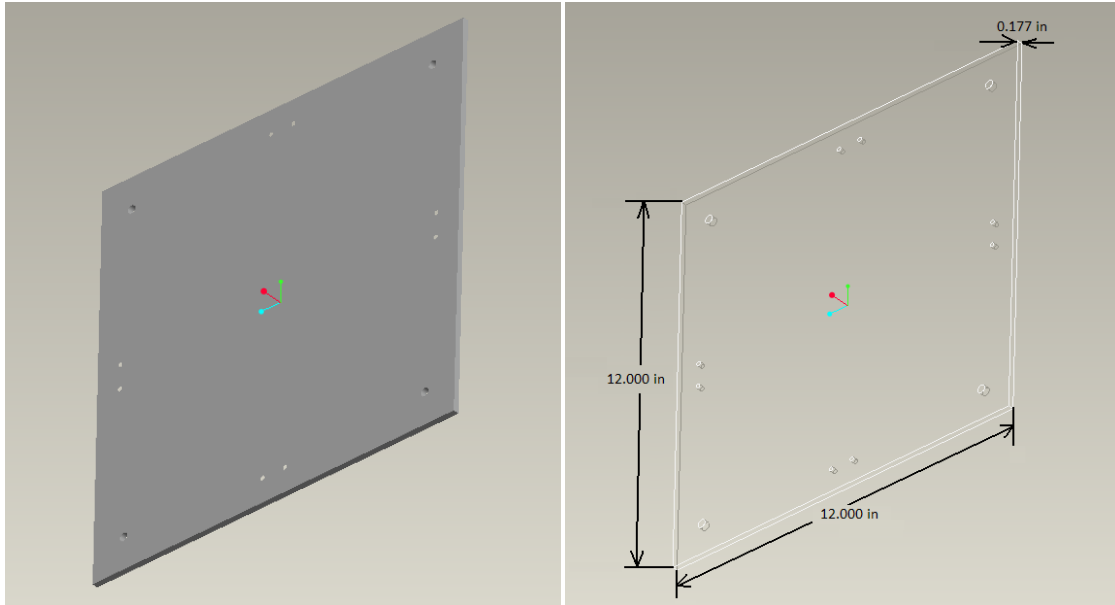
Pro-Engineering CAD model on Aluminum plate showing its dimensions
